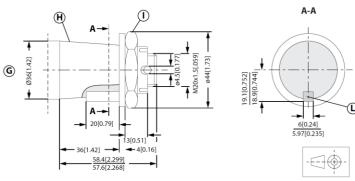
OMH shaft version: Tapered shaft 35 mm DIN 937
